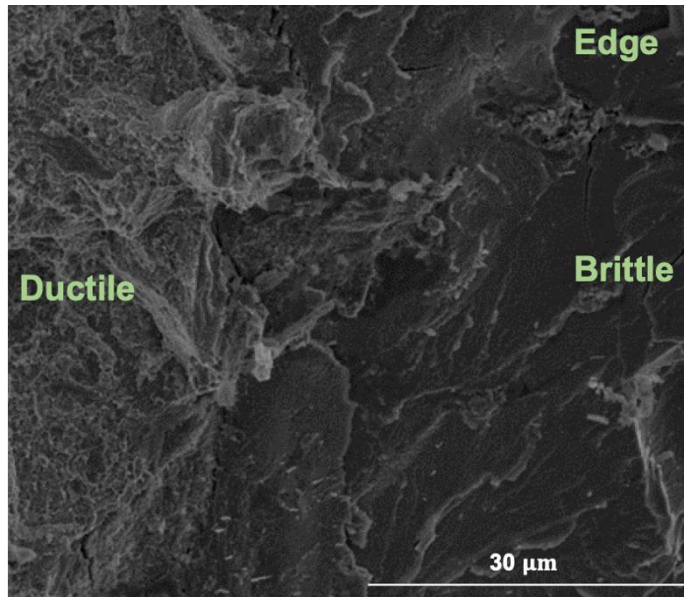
SEM image of tensile fracture surface of a DF4-exposed 0.6 mm thick 347H.
